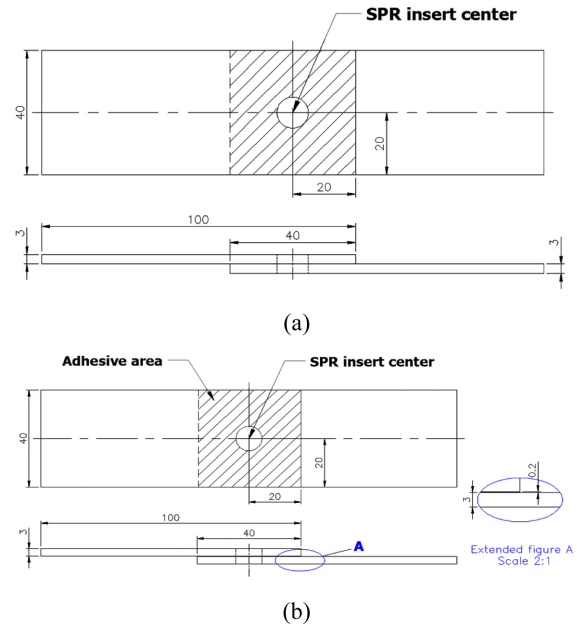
Specimen geometry (single-lap joint): (a) SPR joint, (b) Hybrid joint
